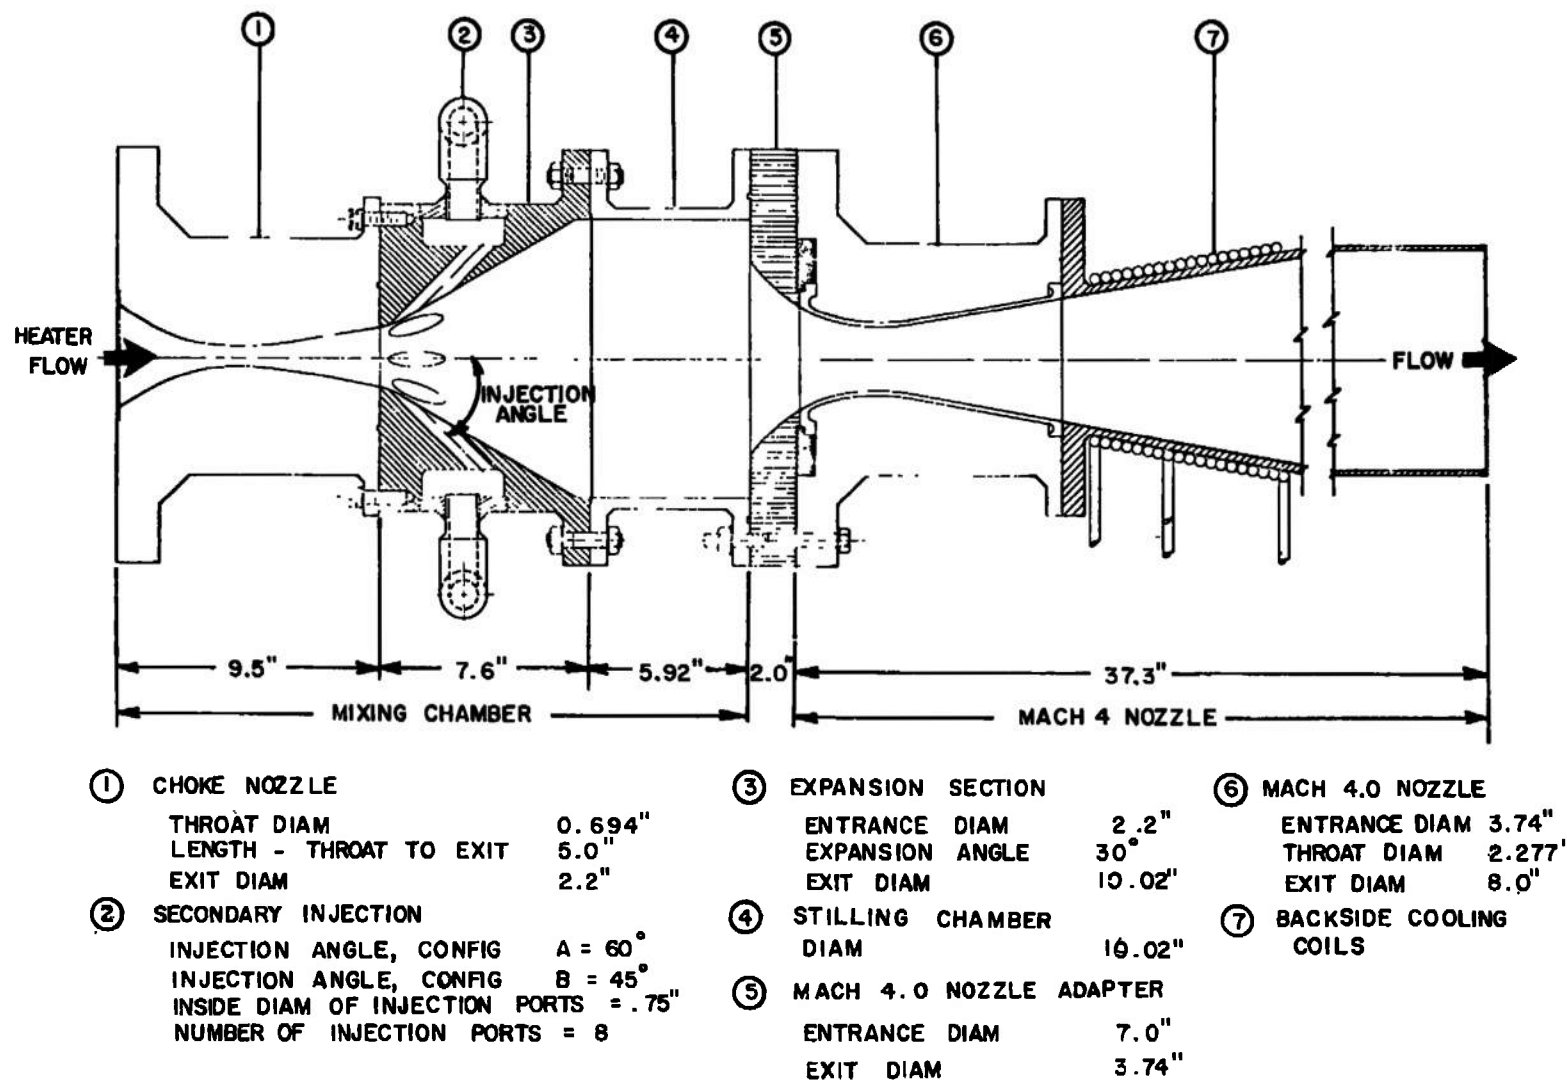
Mixing Chamber and Mach 4.0 Nozzle Dimensions
